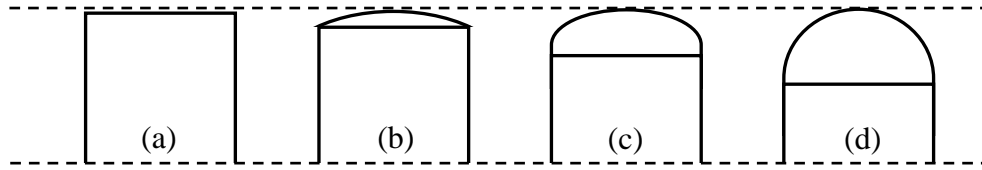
End-cap designs. (a) Disk, (b) Dish, (c) Elliptical, (d) Hemispherical
